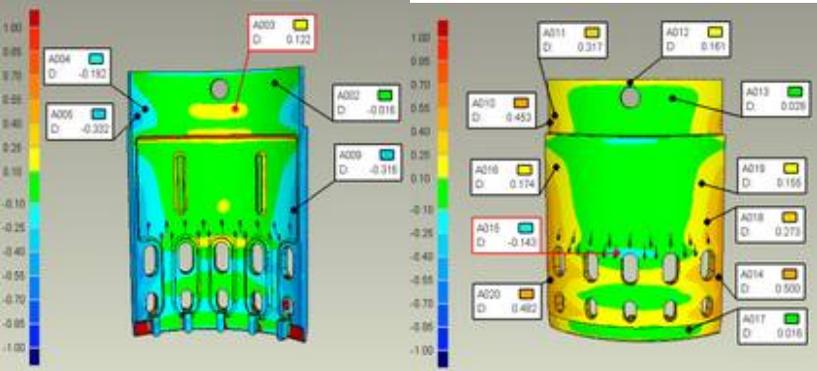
Analysis of the geometrical deviations of a single segment of the workpiece caused by internal stresses arising in the process of selective laser melting
